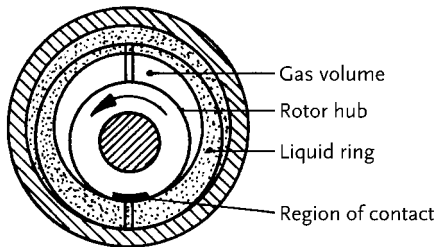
Cross-section of a screw wheel-type liquid ring vacuum pump (acc. to AVN-Neltig)
